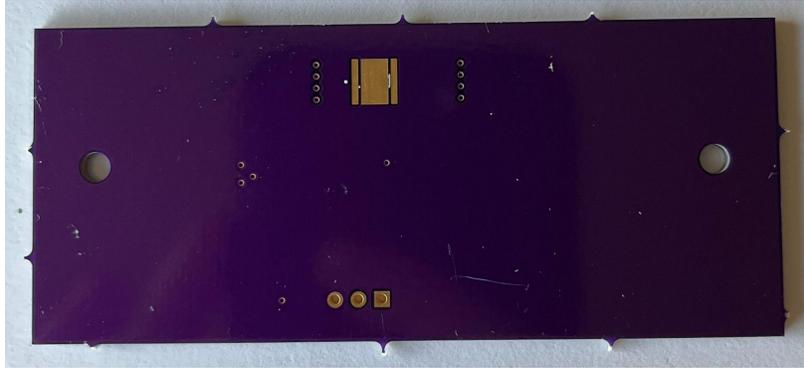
Strobe Light Board Back Unpopulated PCB
